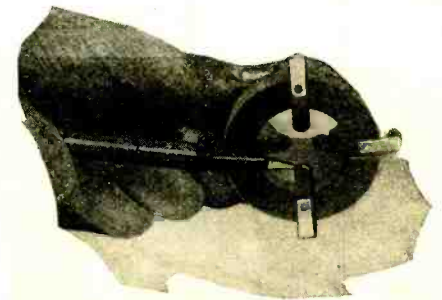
The pencil indicates a bent contact spring on the vacuum tube socket.
